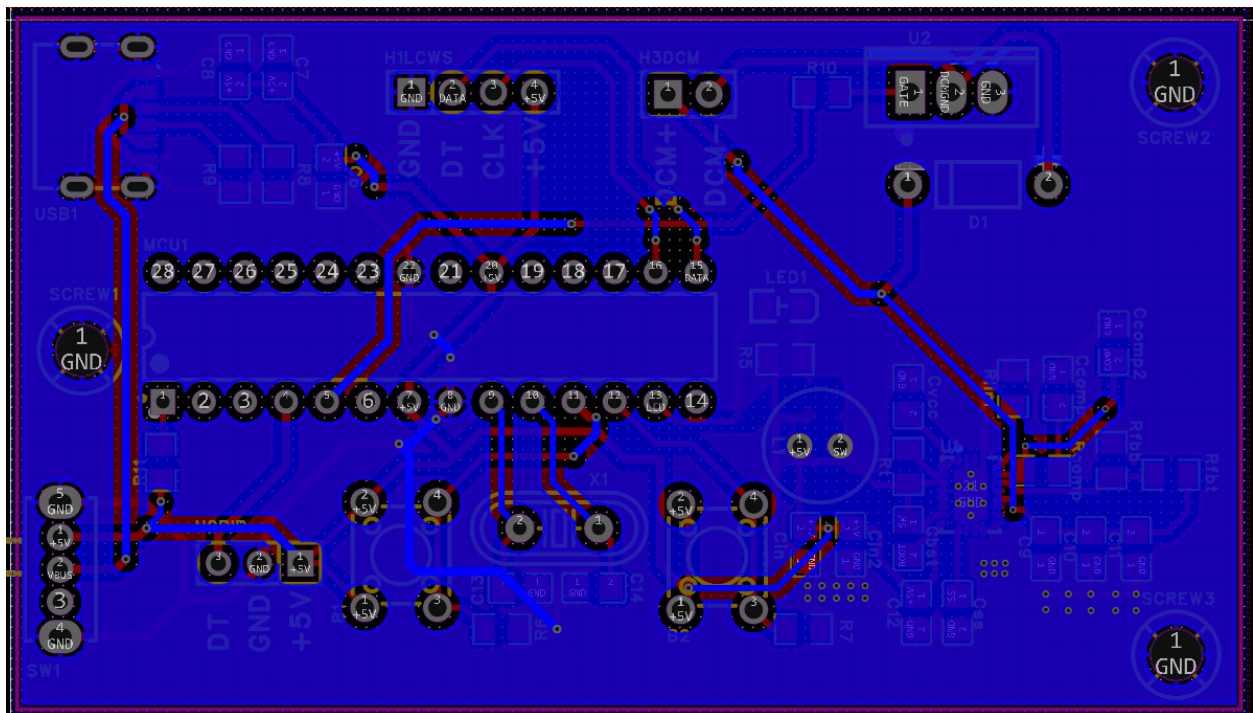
D: Physical PCB Layout Design (Bottom Layer)
